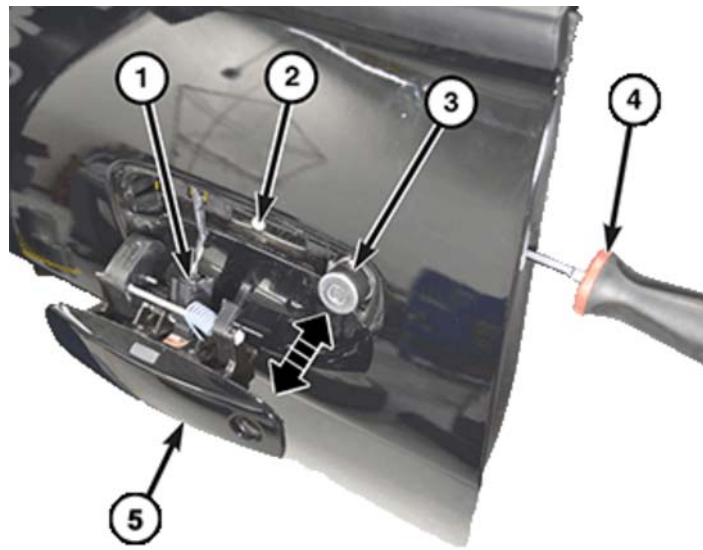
Wire Harness Connector, Screw, Lock Cylinder, Suitable Tool & Exterior Door Handle
